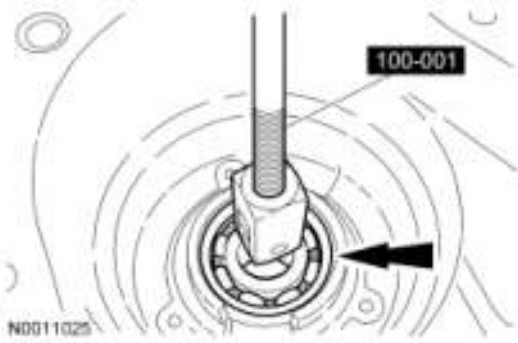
Locating Rear Output Shaft Support Bearing And Special Tool
